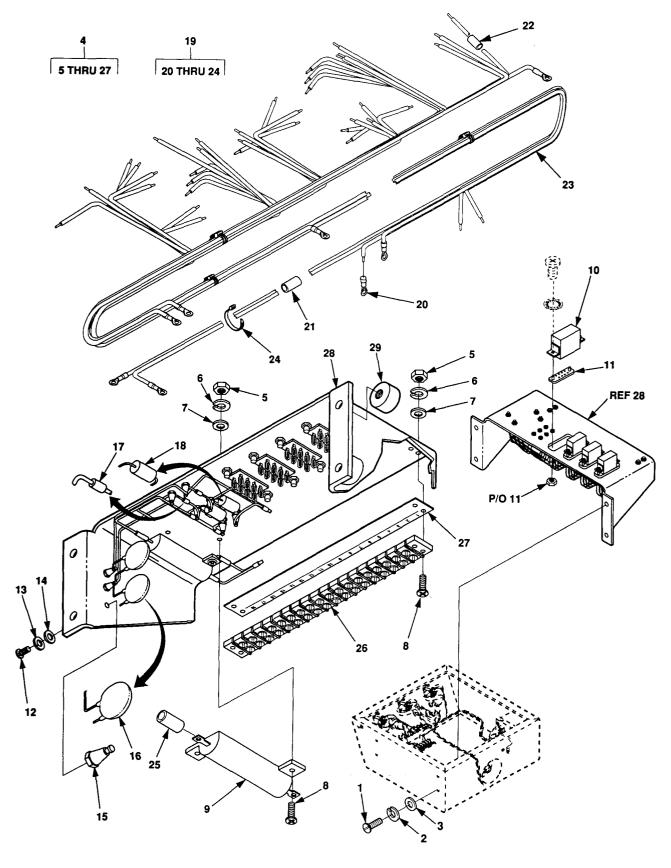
Relay Board Harness Assembly (Sheet 1 of 2)
